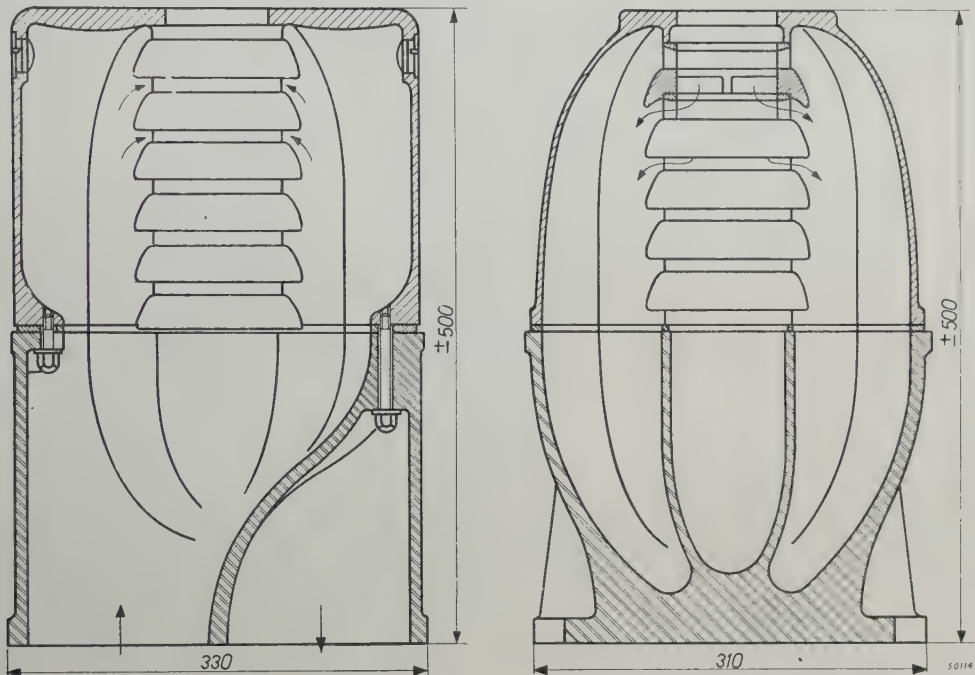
Cross sections of a cooler with an inlet and outlet channel each describing 1/4 of a winding of a helix. The air distributor consists of stream-lined aluminium castings one on top of the other. The cooler housing is partly of ceramic material. The main dimensions are given in mm.
